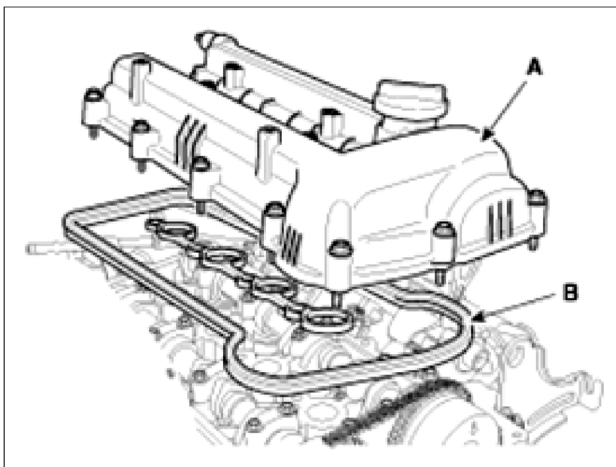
Applying Liquid Gasket on Cylinder Head Cover
